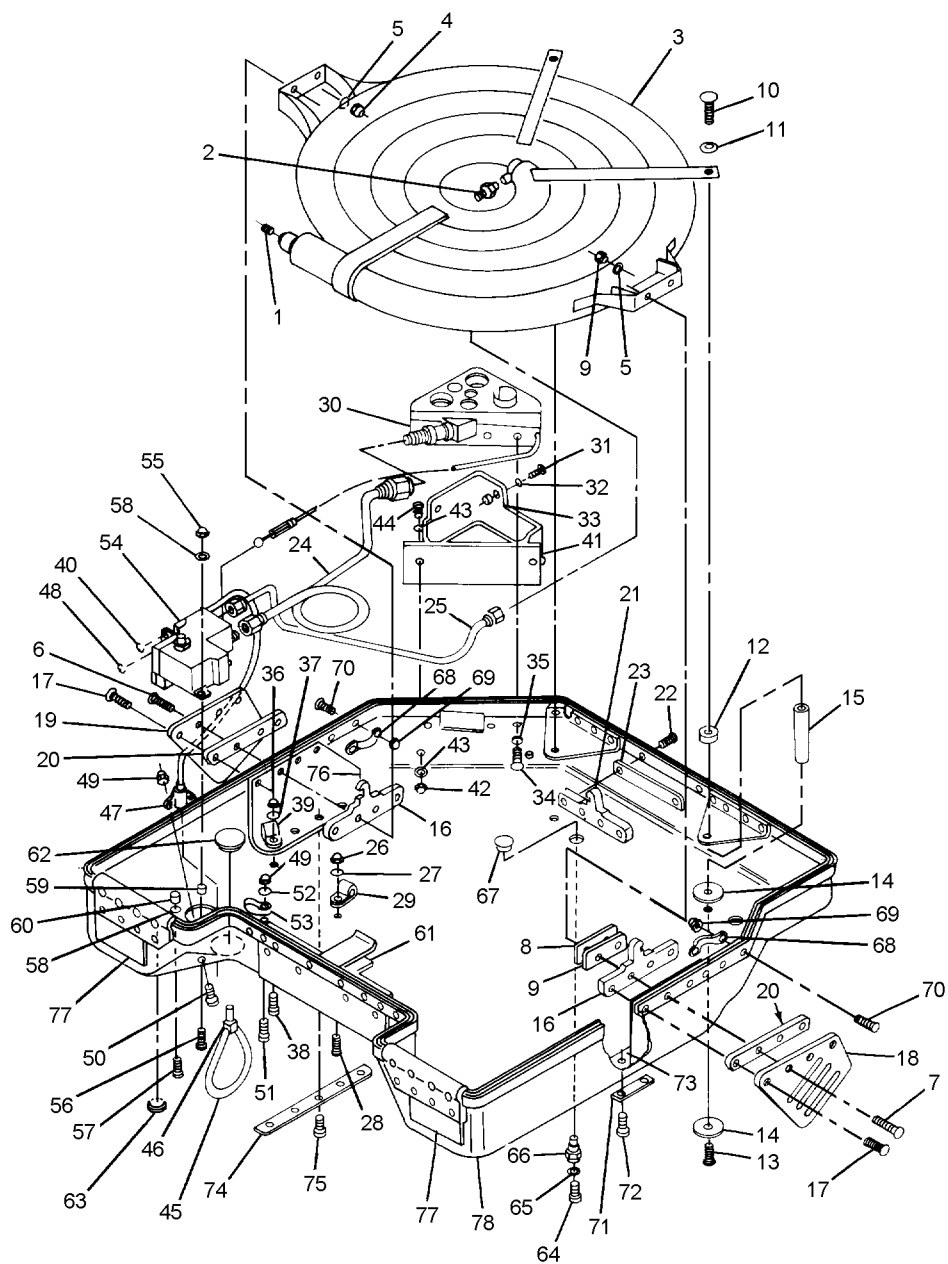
Lower Container Assembly and Handle Assembly (Rocket Jet)
